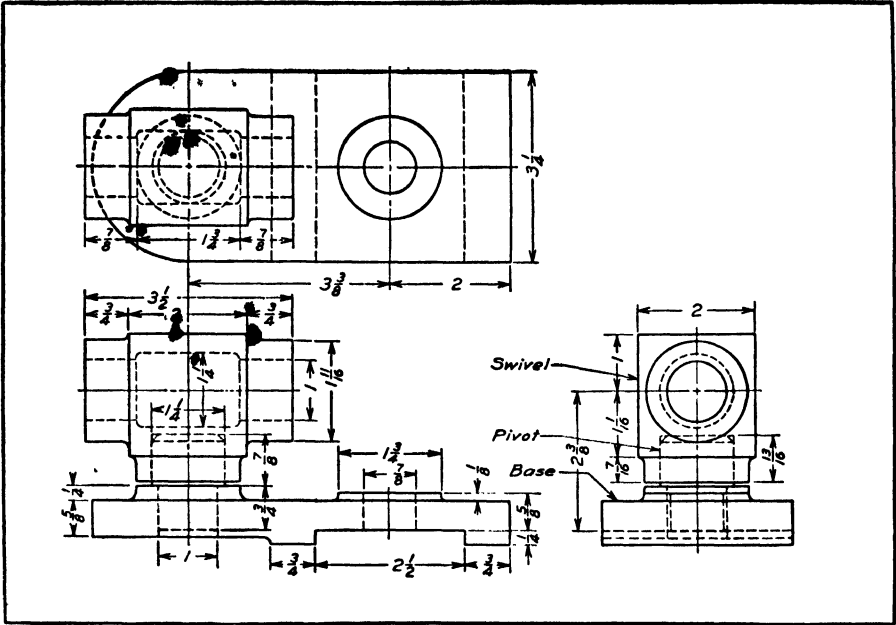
Prob. 151. Draw three views of the swivel base. The front view to be in section.
